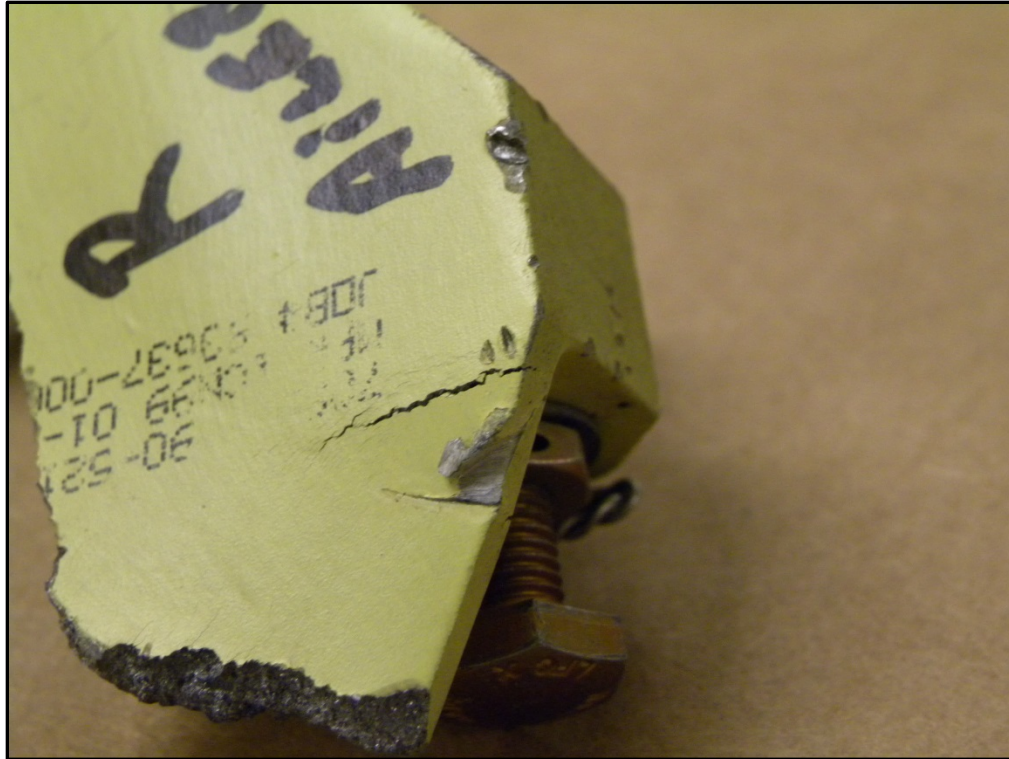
Fracture Under -6 Pivot Assembly from Buckling
